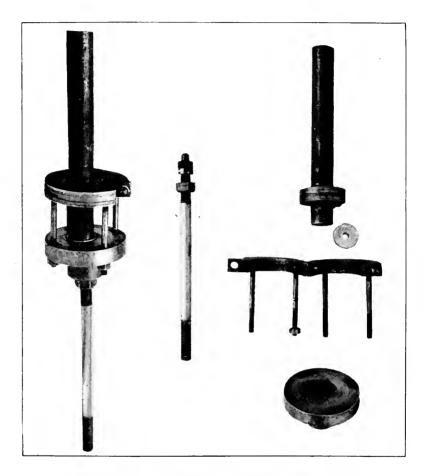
Parts of Clamp for Stopping End of Tube (on the right)
